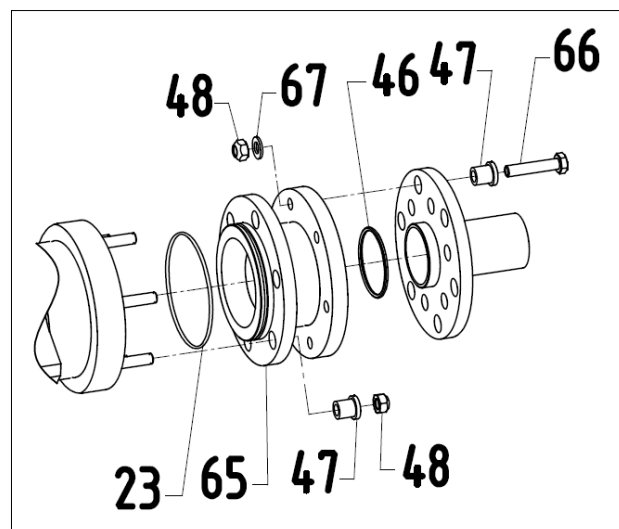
Propeller Assembly Part 8 - spacer (optional)
